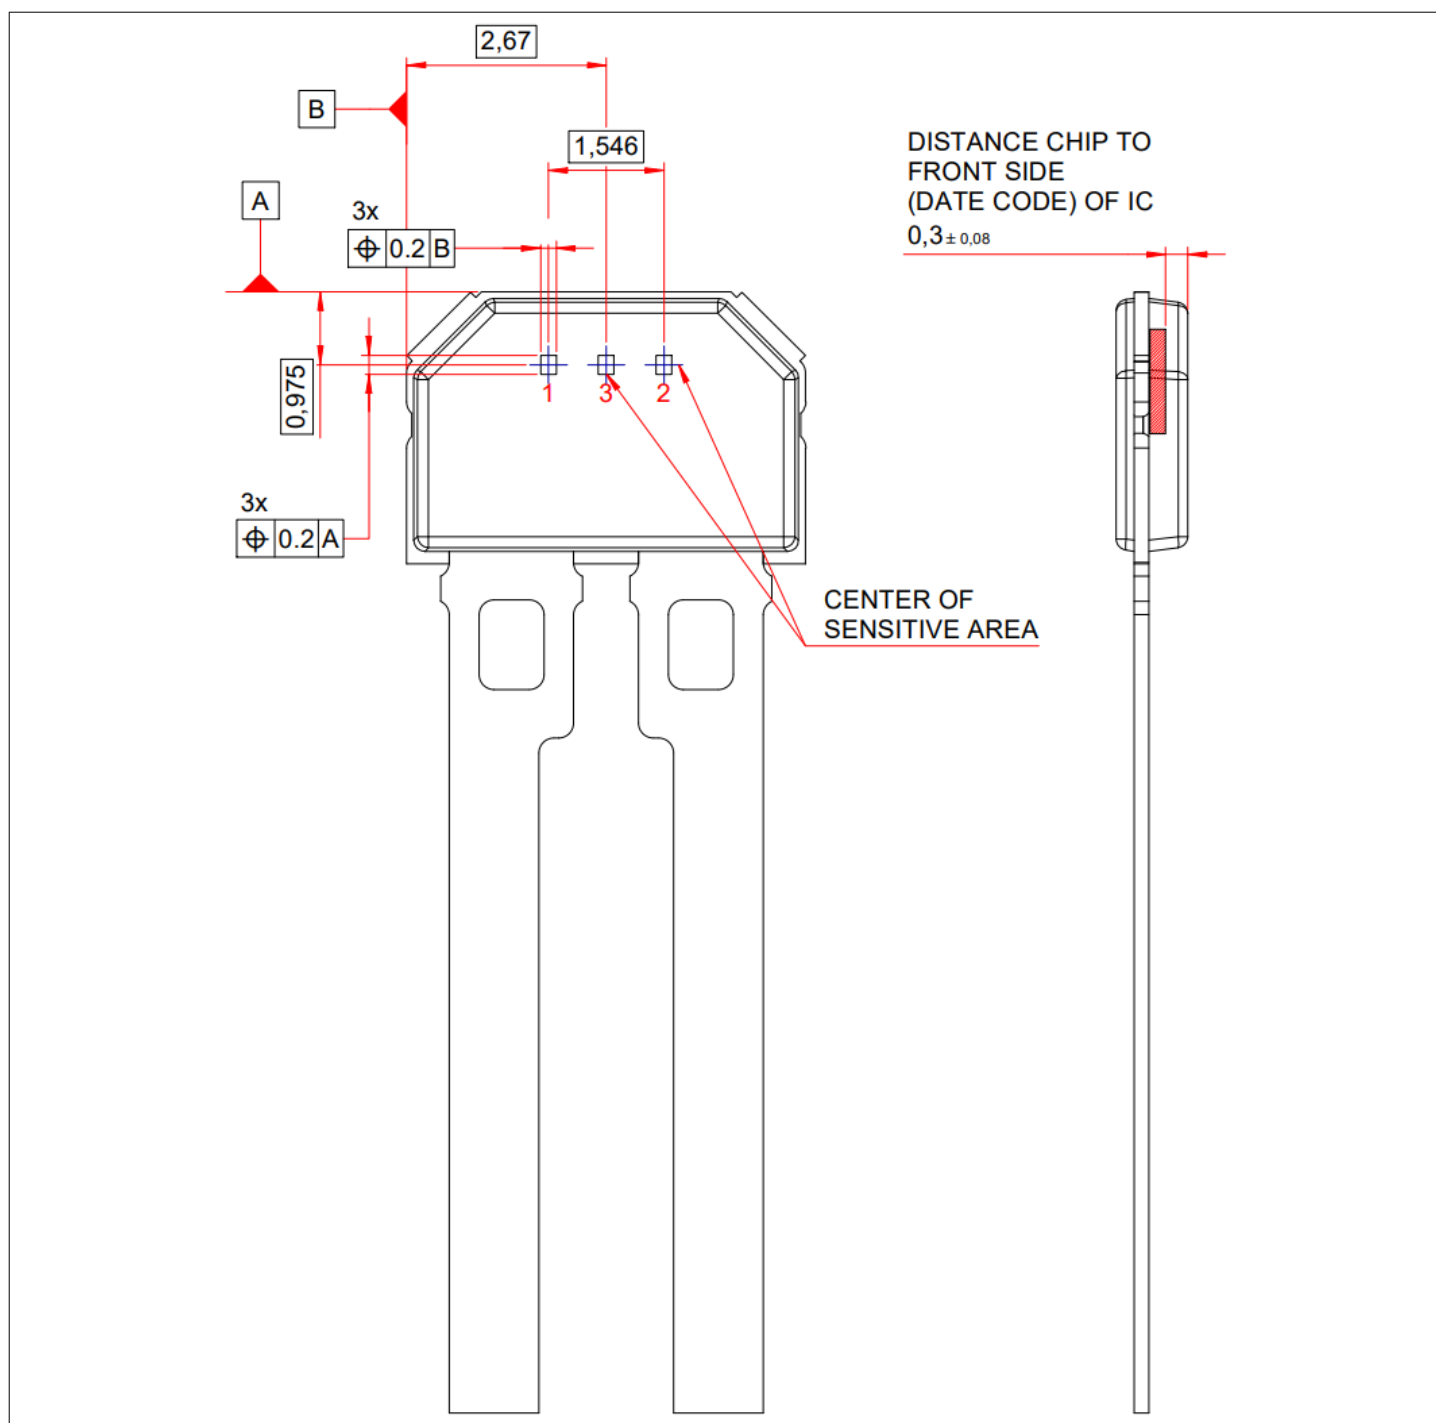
PG-SSO-2-51 package outline - sensing elements position details
